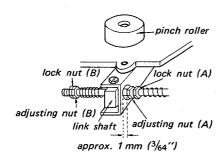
Pinch roller pressure adjustment (1)
